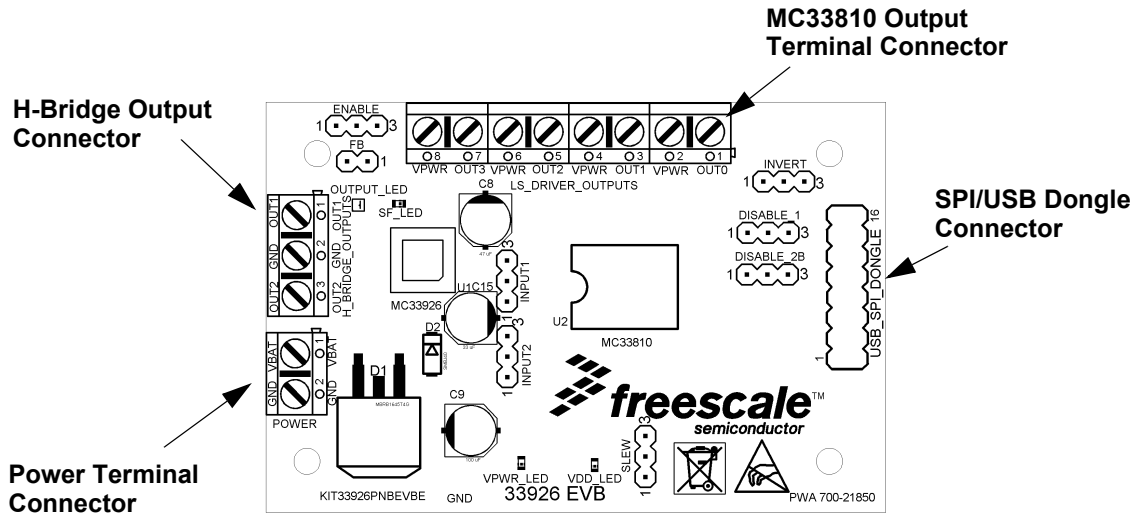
PCB Top Assembly Layer with Screw-Terminal Connectors Indicated
